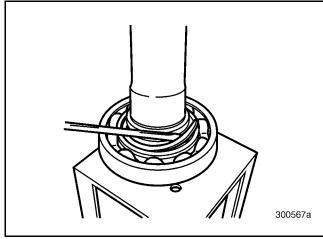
Removing Spiral Snap Ring from Main Drive Pinion
